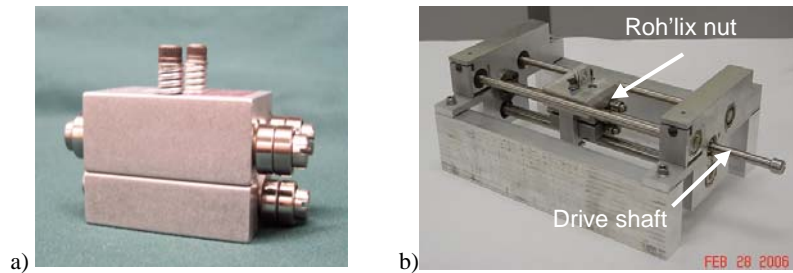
a) Roh'lix[®] nut from Zero-Max with angular contact bearings b) Complete Roh'lix[®] drive mechanism assembly.
